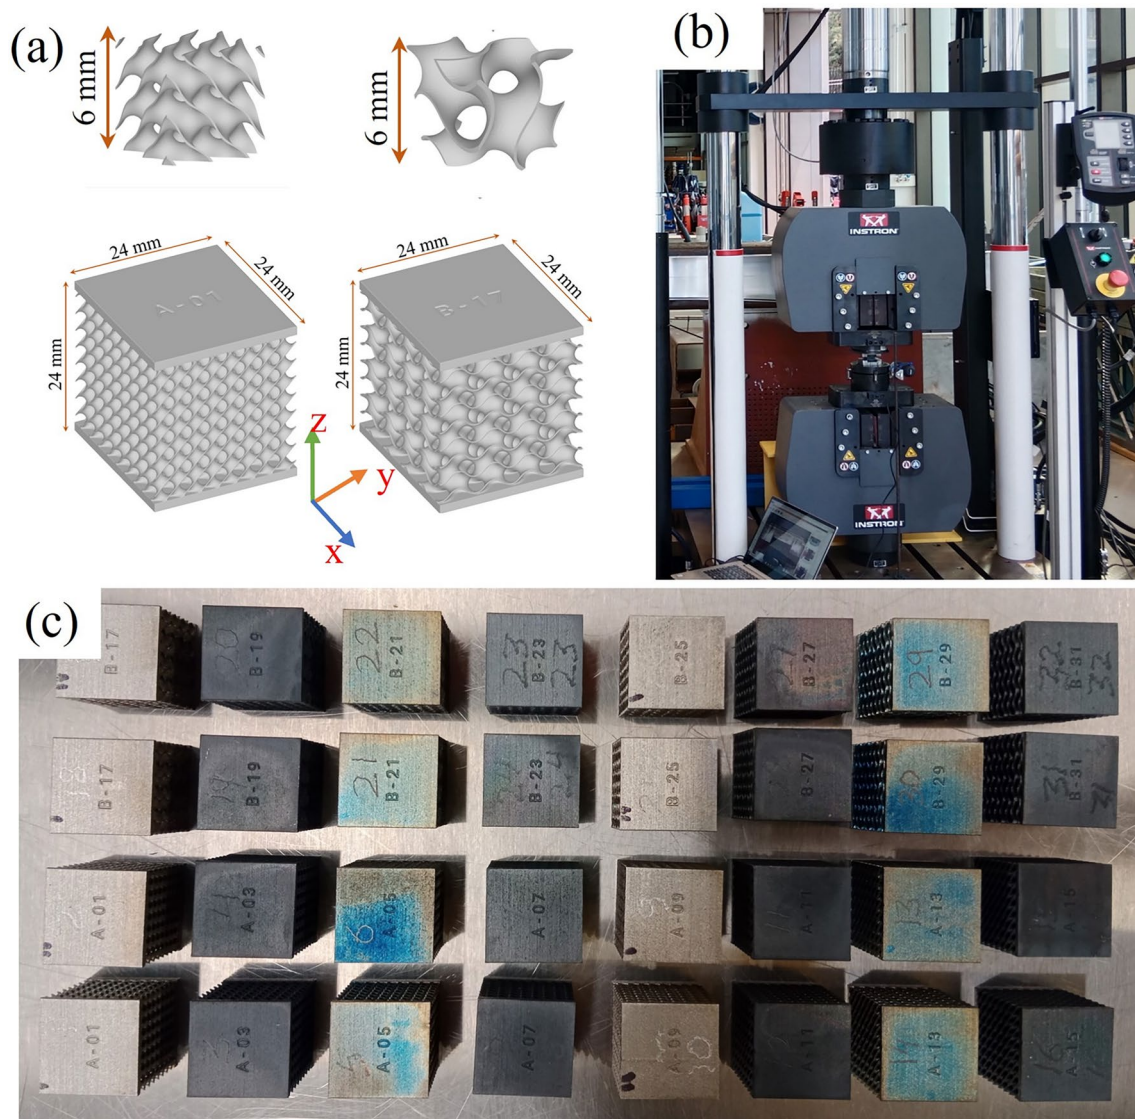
a CAD model and fabricated TPMS structures, b Universal testing machine, d Fabricated and heat treated TPMS samples
